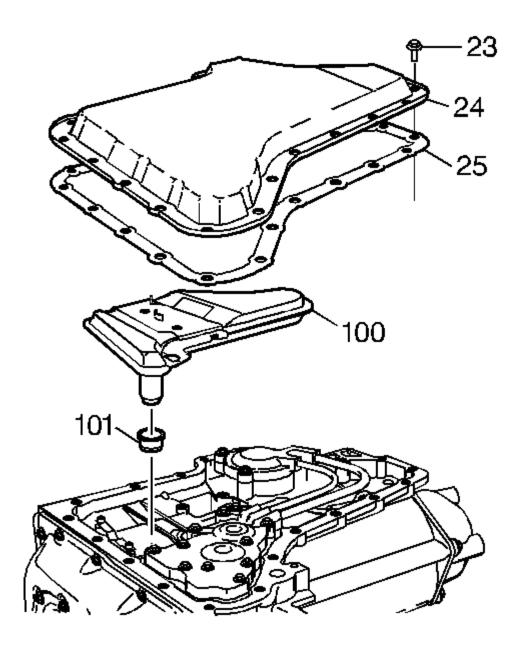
View Of Filter, Oil Pan & Oil Pan Bolts Courtesy of GENERAL MOTORS COMPANY
